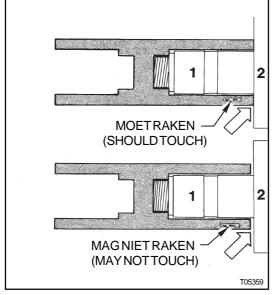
To check the spindle installation dimension by using the tool of Figure 9.
